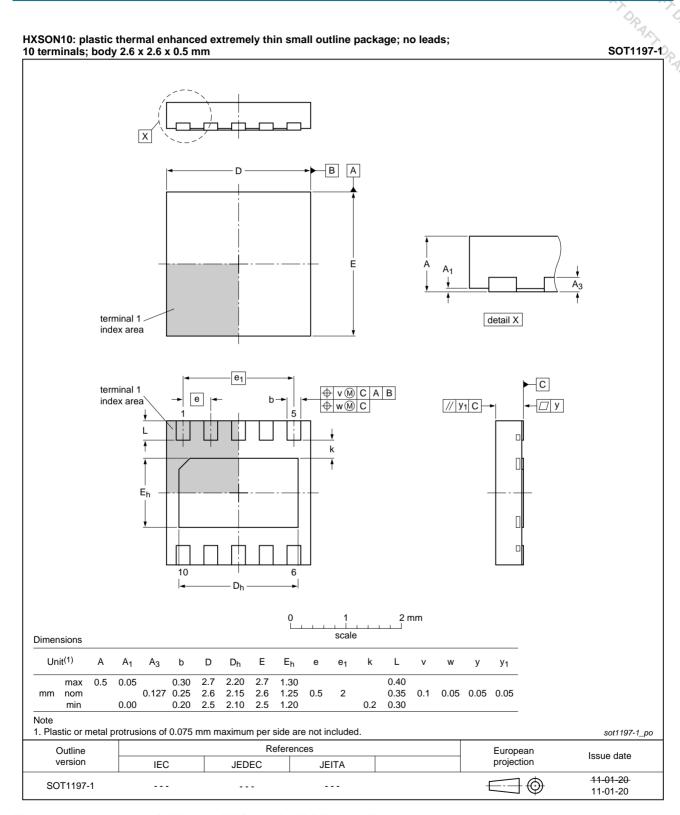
Package outline SOT1197-1 (HXSON10) of PCF85063ATL
